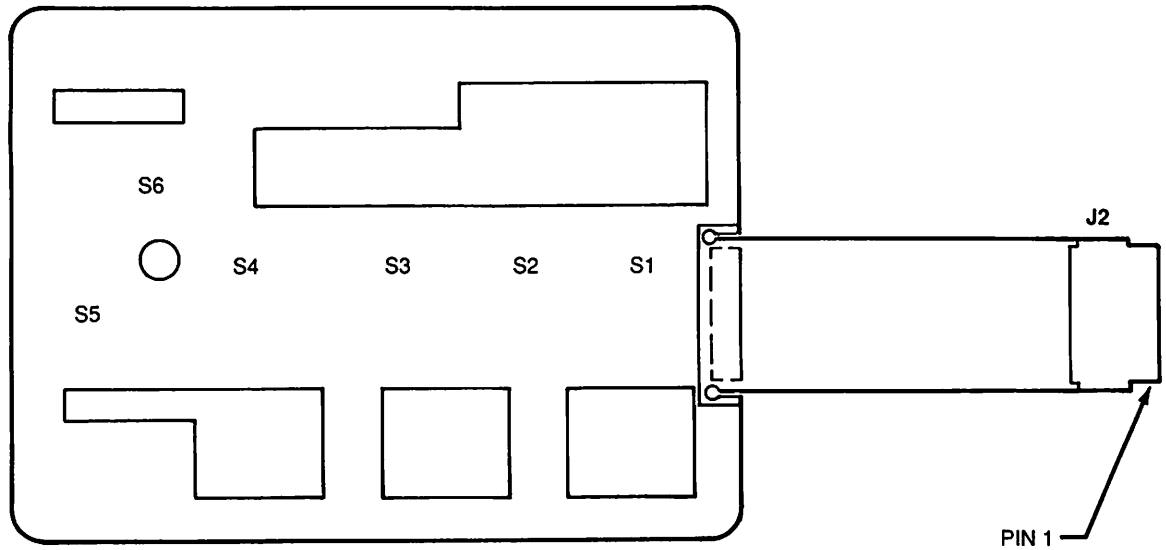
WIRE HARNESS ASSEMBLY
